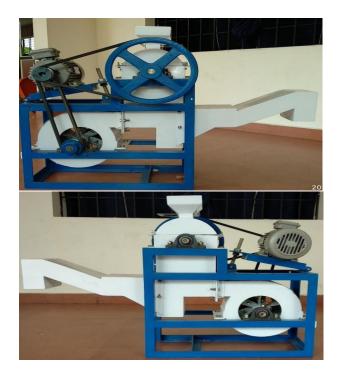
Full Assembled View Of Automatic Groundnut Decorticator
